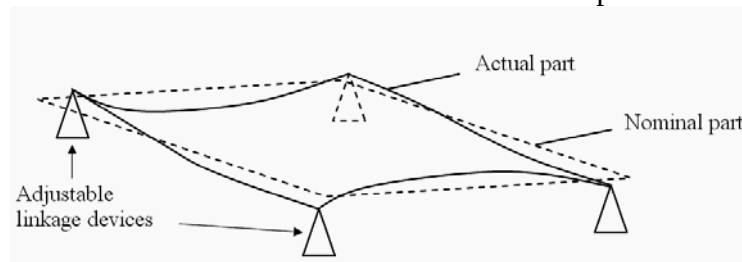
; Assembly of a flexible part with adjustable linkage devices.
